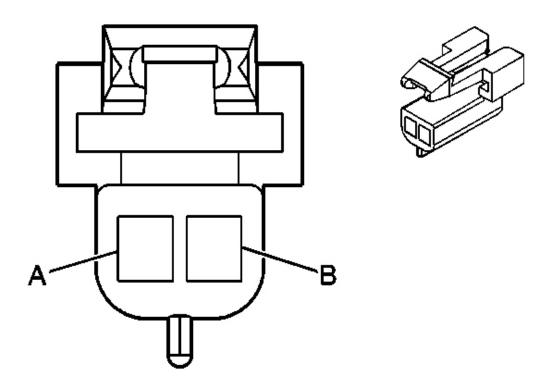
Speaker - Left Front Door (UQ3) Connector End View Courtesy of GENERAL MOTORS CORP.
